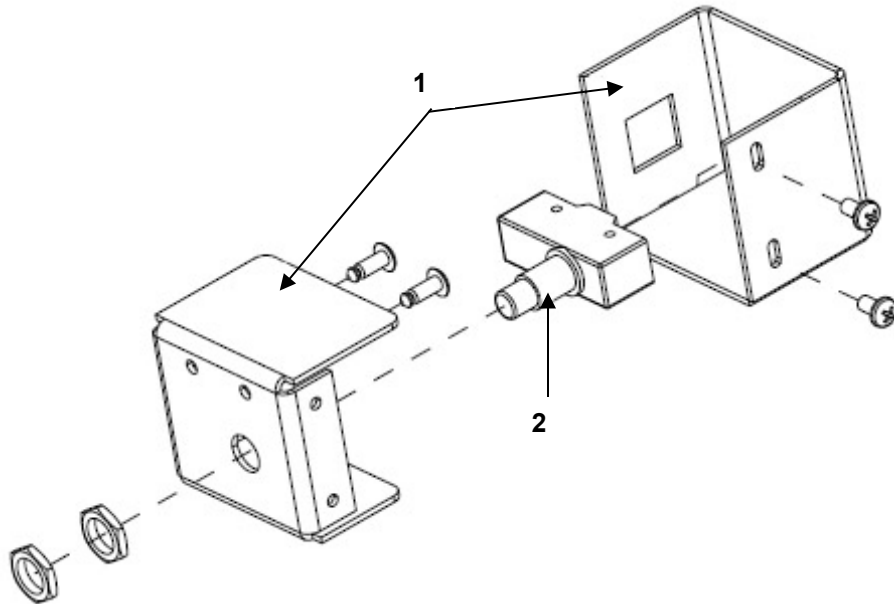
LIGHTING INTERRUPTER DOOR SWITCH
